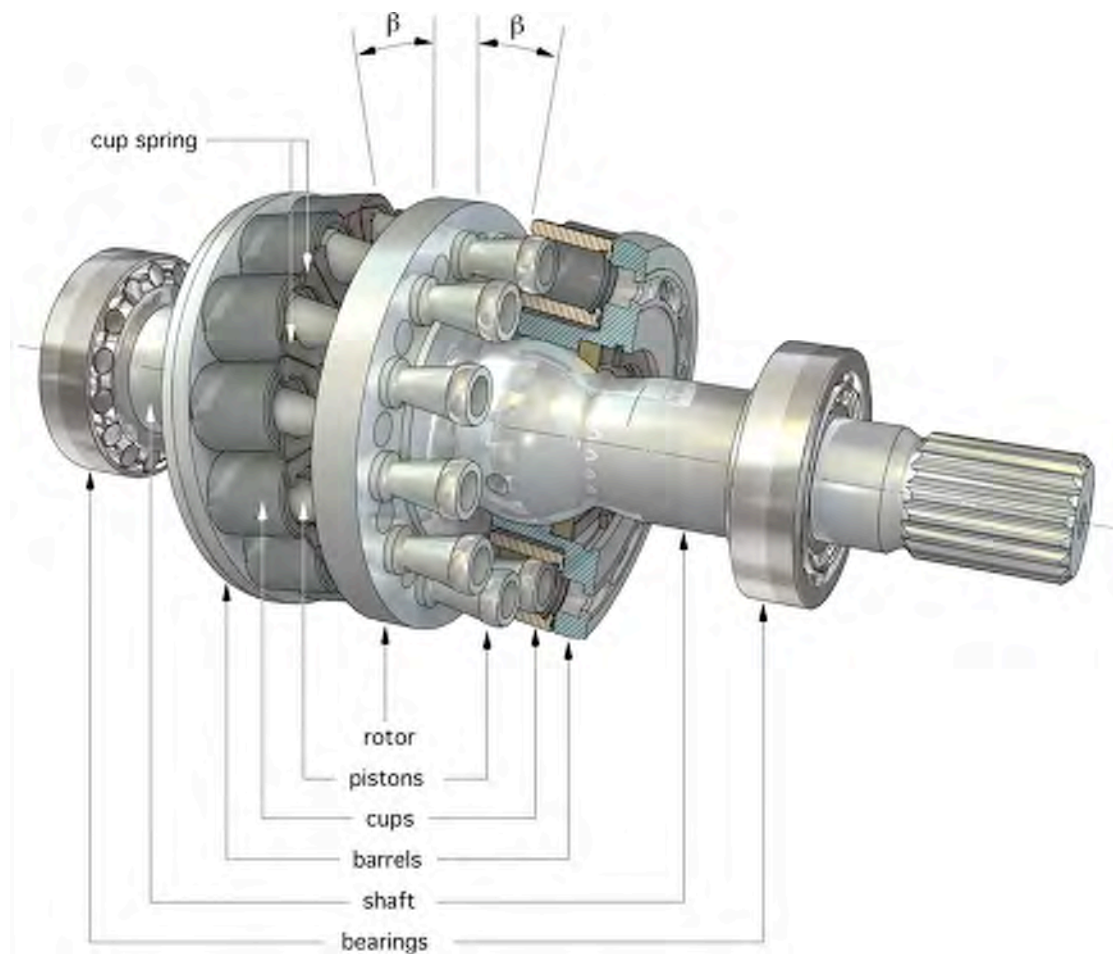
Rotating parts of the floating cup principle showing a cutaway view of the right barrel.
